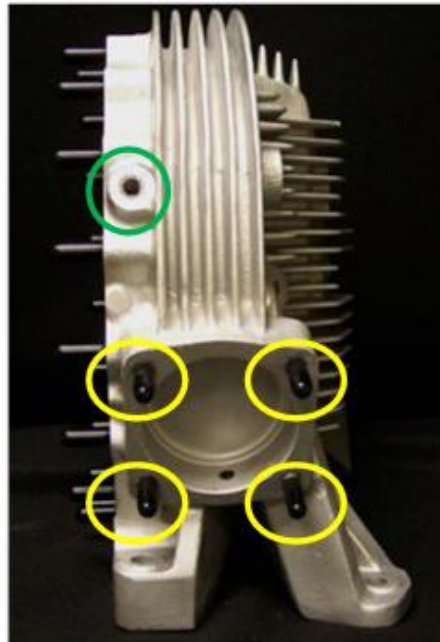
Tail rotor gearbox housing; profile contains four studs (yellow) and one insert (green).
